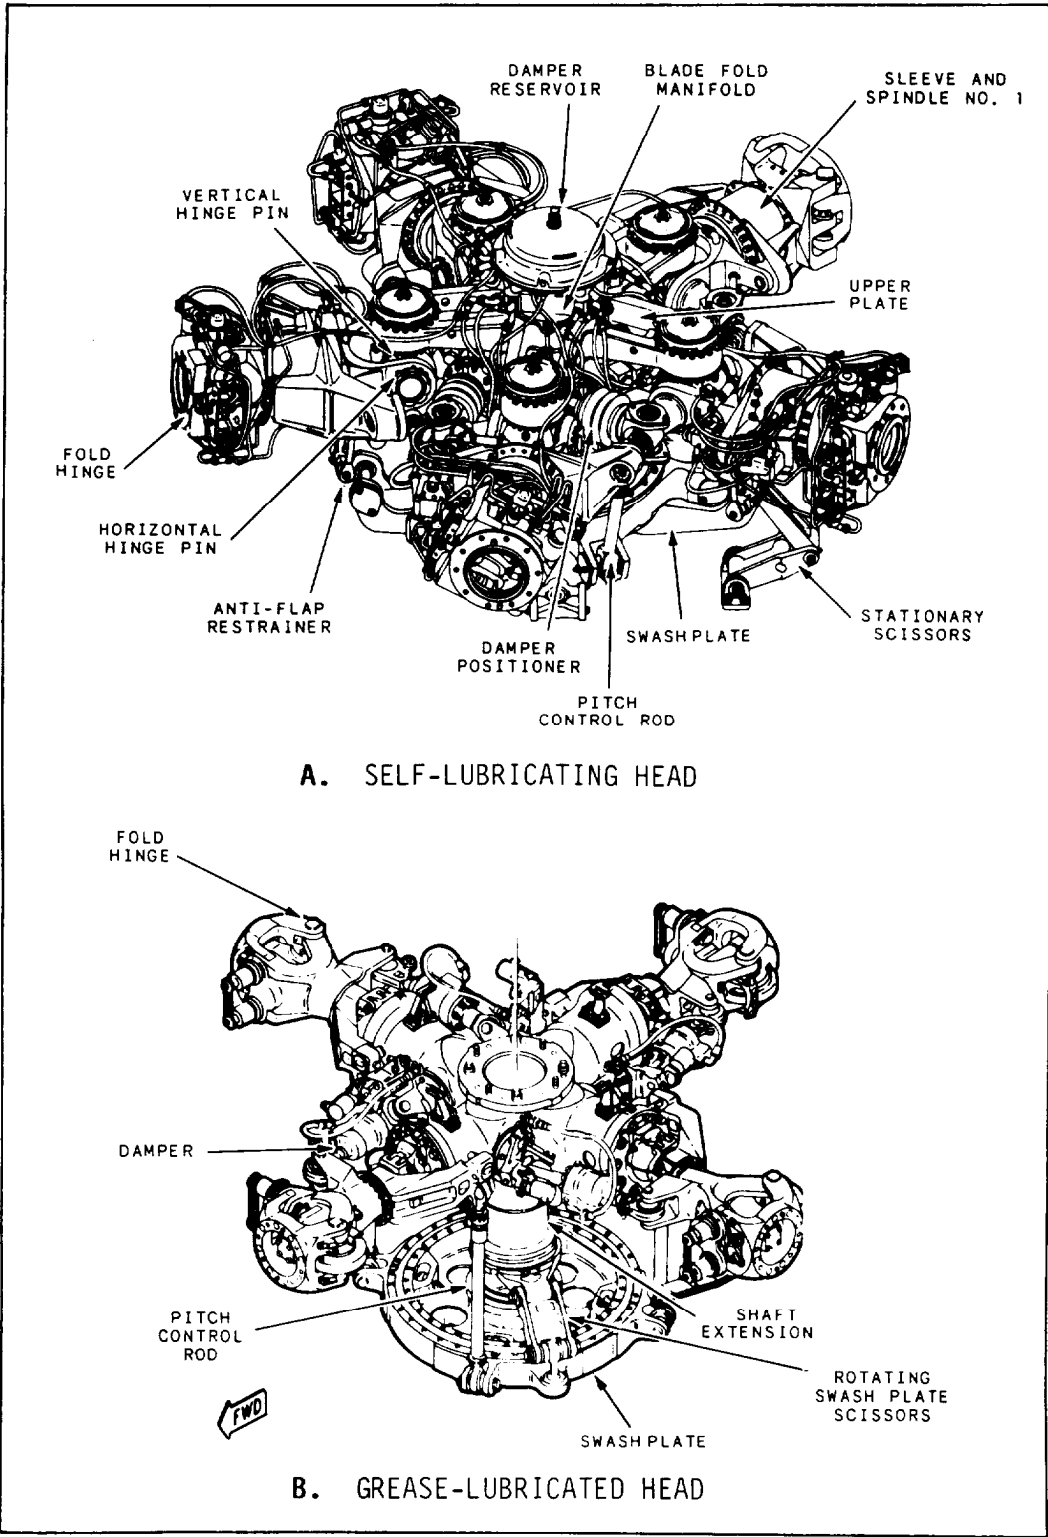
Rotary wing head assemblies; (A) Self-lubricating head; (B) Grease-lubricated head.
